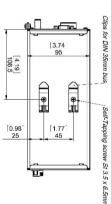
Dimensions of controller LPC-2000.1-10 Note 1: Non-tolerated dimensions are for reference only.
